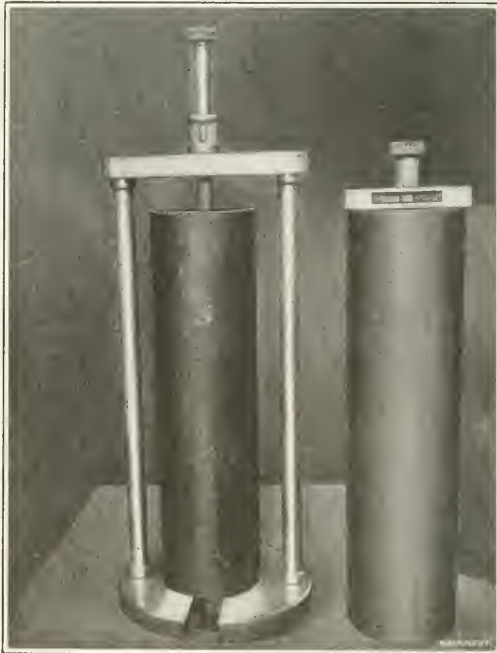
Gaging Total Length of Trimmed Forging prior to turning which the shell is heated for nosing-in. The production is four per hour.
